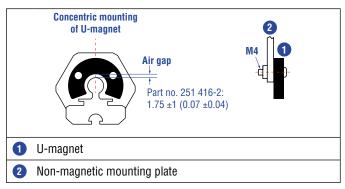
Mounting of U-magnet (part no. 251 416-2)
